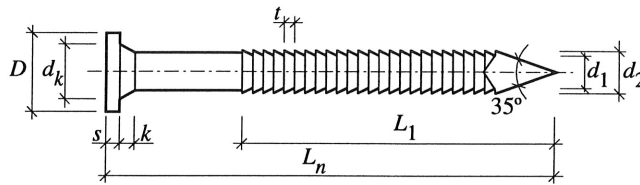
Annular ringed shank nail for steel-to-timber connections with a cone shaped shank close to the nail head.
